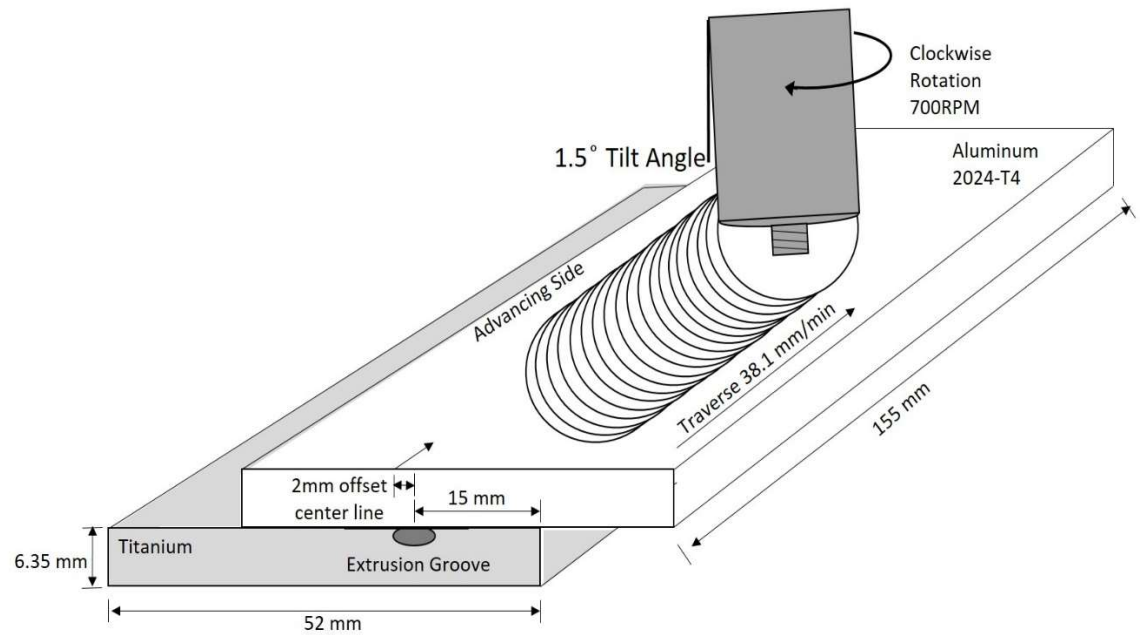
Friction Stir Extrusion setup for joining aluminum to titanium
